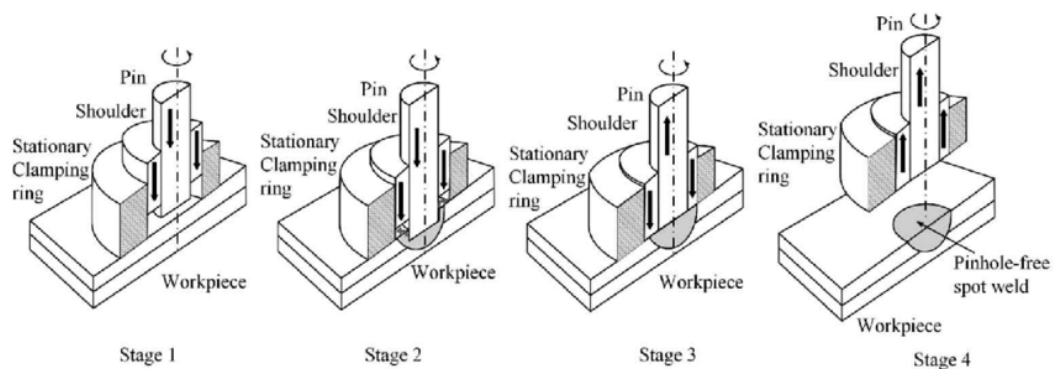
Refill Friction Stir Spot Welding (RFSSW)
